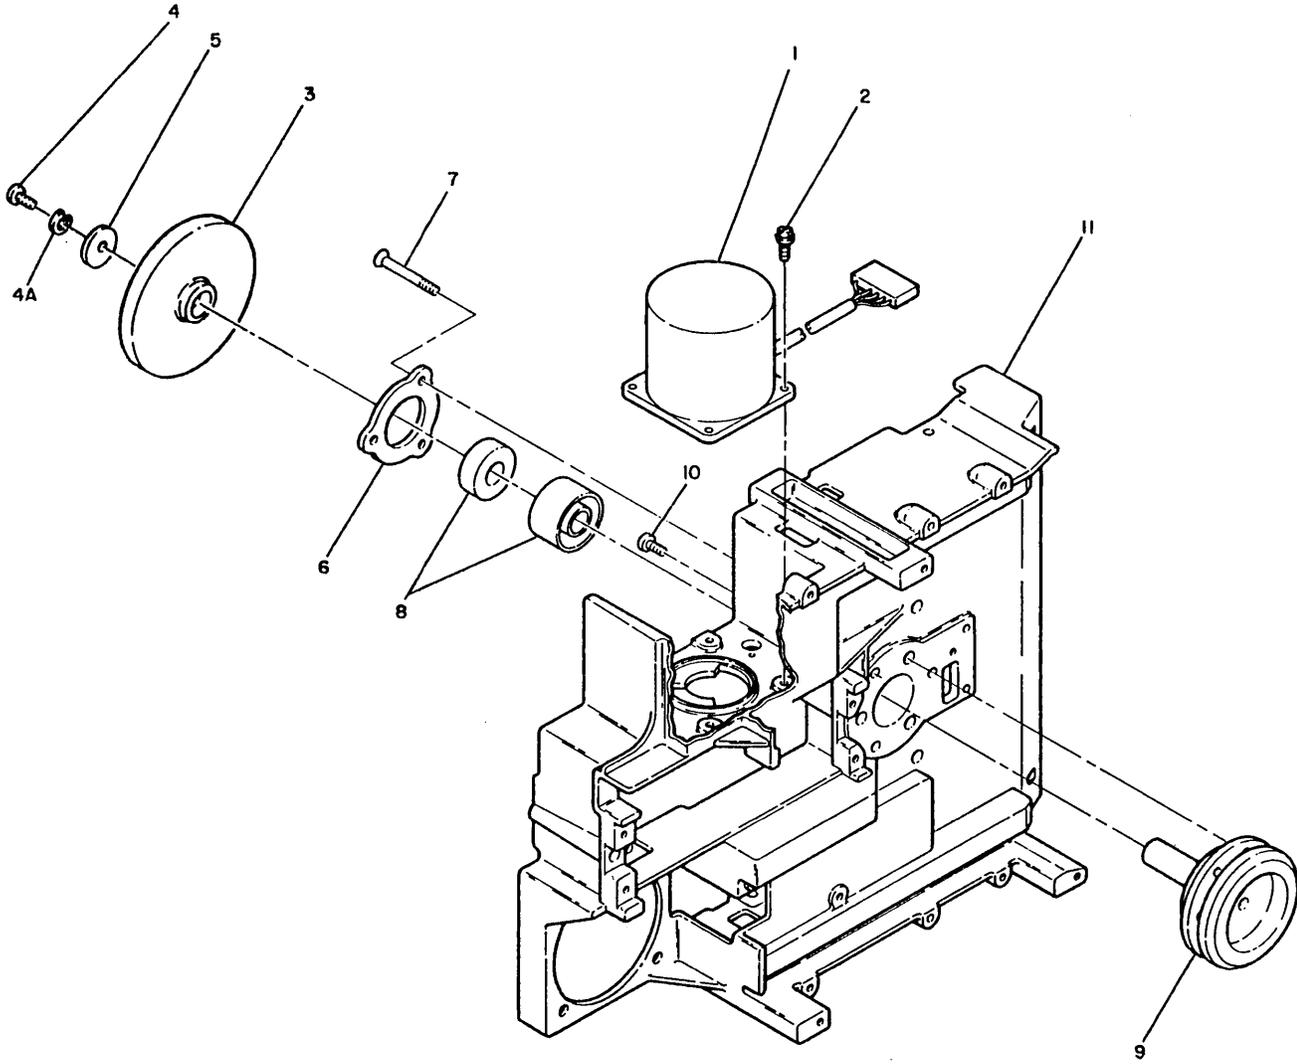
SPINDLE AND PULLEY ASSEMBLY
